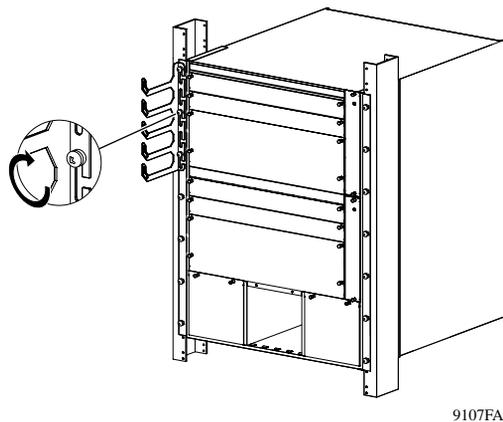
Securing the cable guide to the chassis: 8006 Chassis
